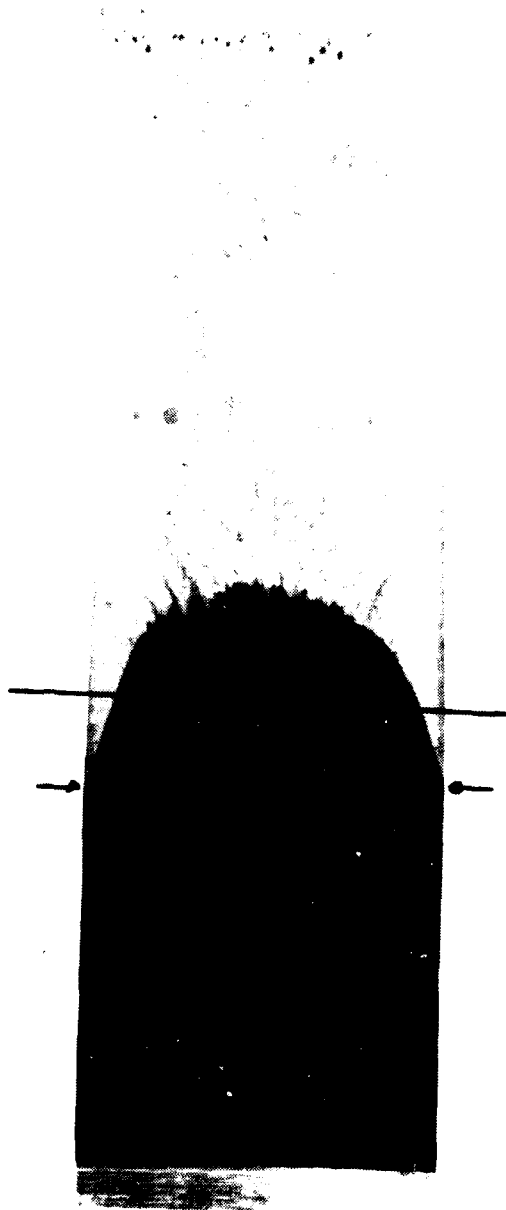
Fracture Surface - CT Specimen 15-8
